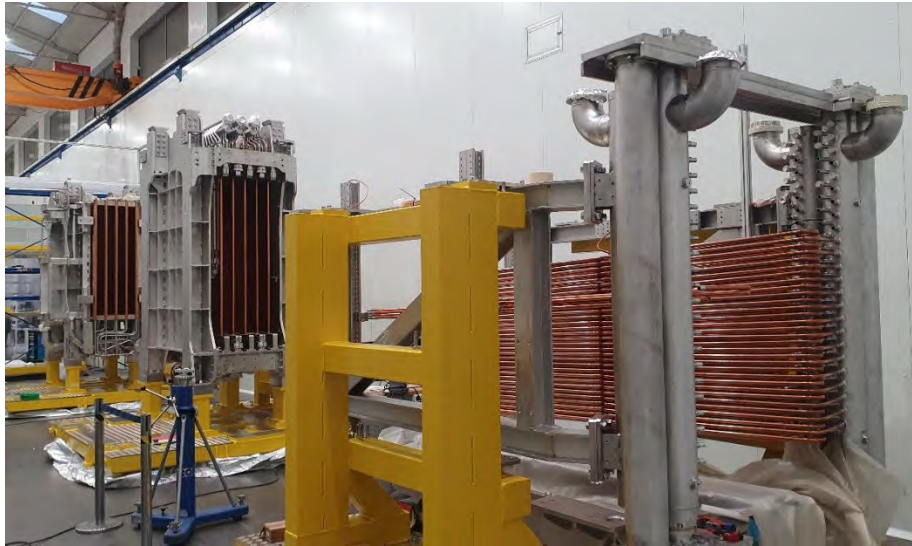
The MITICA 3 Beam line Components in different status of progress. On the right side of the image appears the Calorimeter with the on-going welding of swirl tubes with the manifolds. The component in the middle of the picture is the Residual Ion Dump with the panels mounted on the support structure and the stand-off insulators mounted. The component shown on the left side of the picture is the Neutralizer with the sandwich of panels assembled and pipe work completed..
